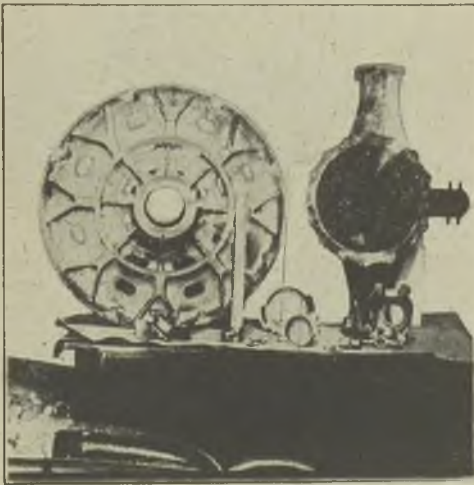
A REAR WHEEL AND BACK AXLE CASING.
